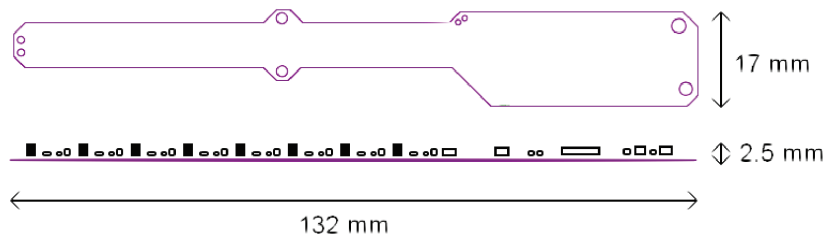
Mechanical layout of the Vision Tape with dimensions. Top view (top), side view (bottom).
